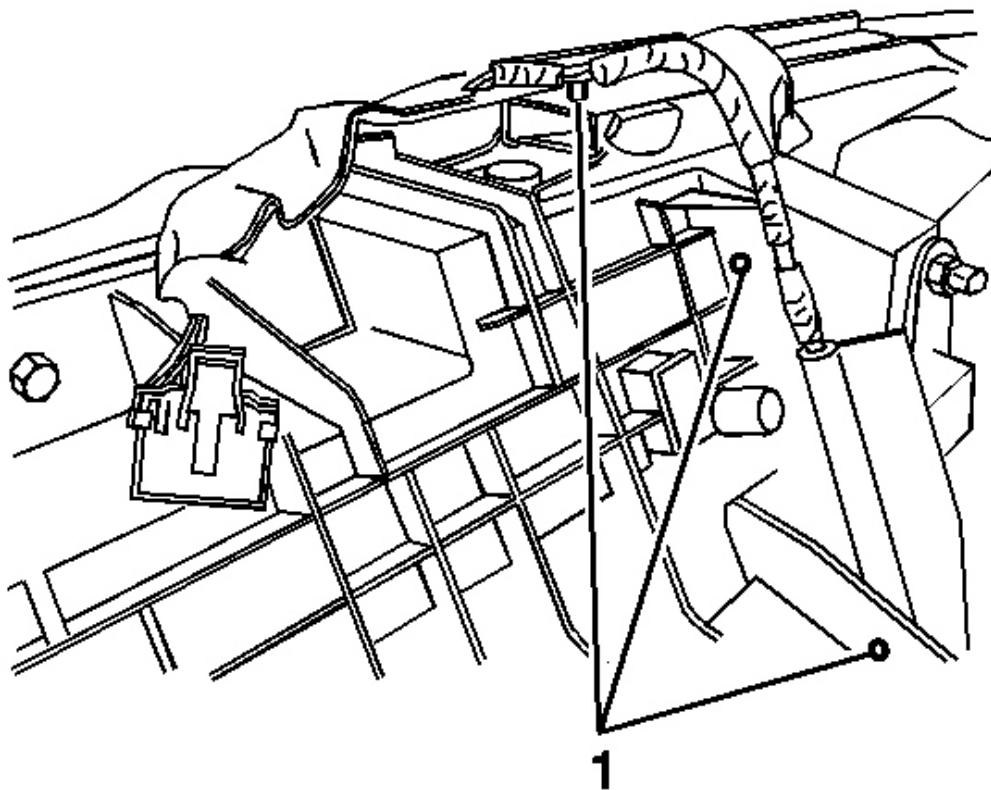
View Of HVAC Center Support Bracket, HVAC Module & Retaining Nuts
